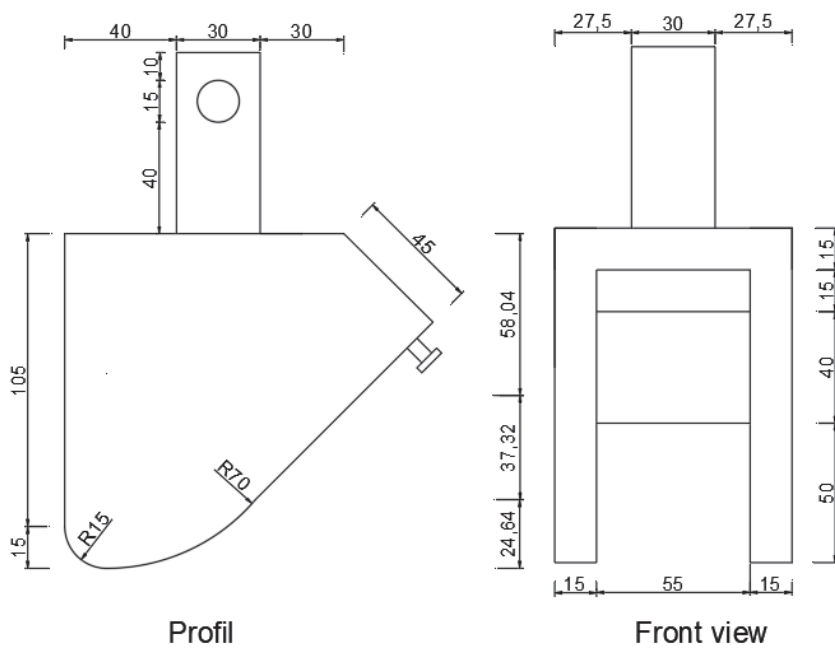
Profile and Front view of the mechanical grip system (dimensions are in mm).
